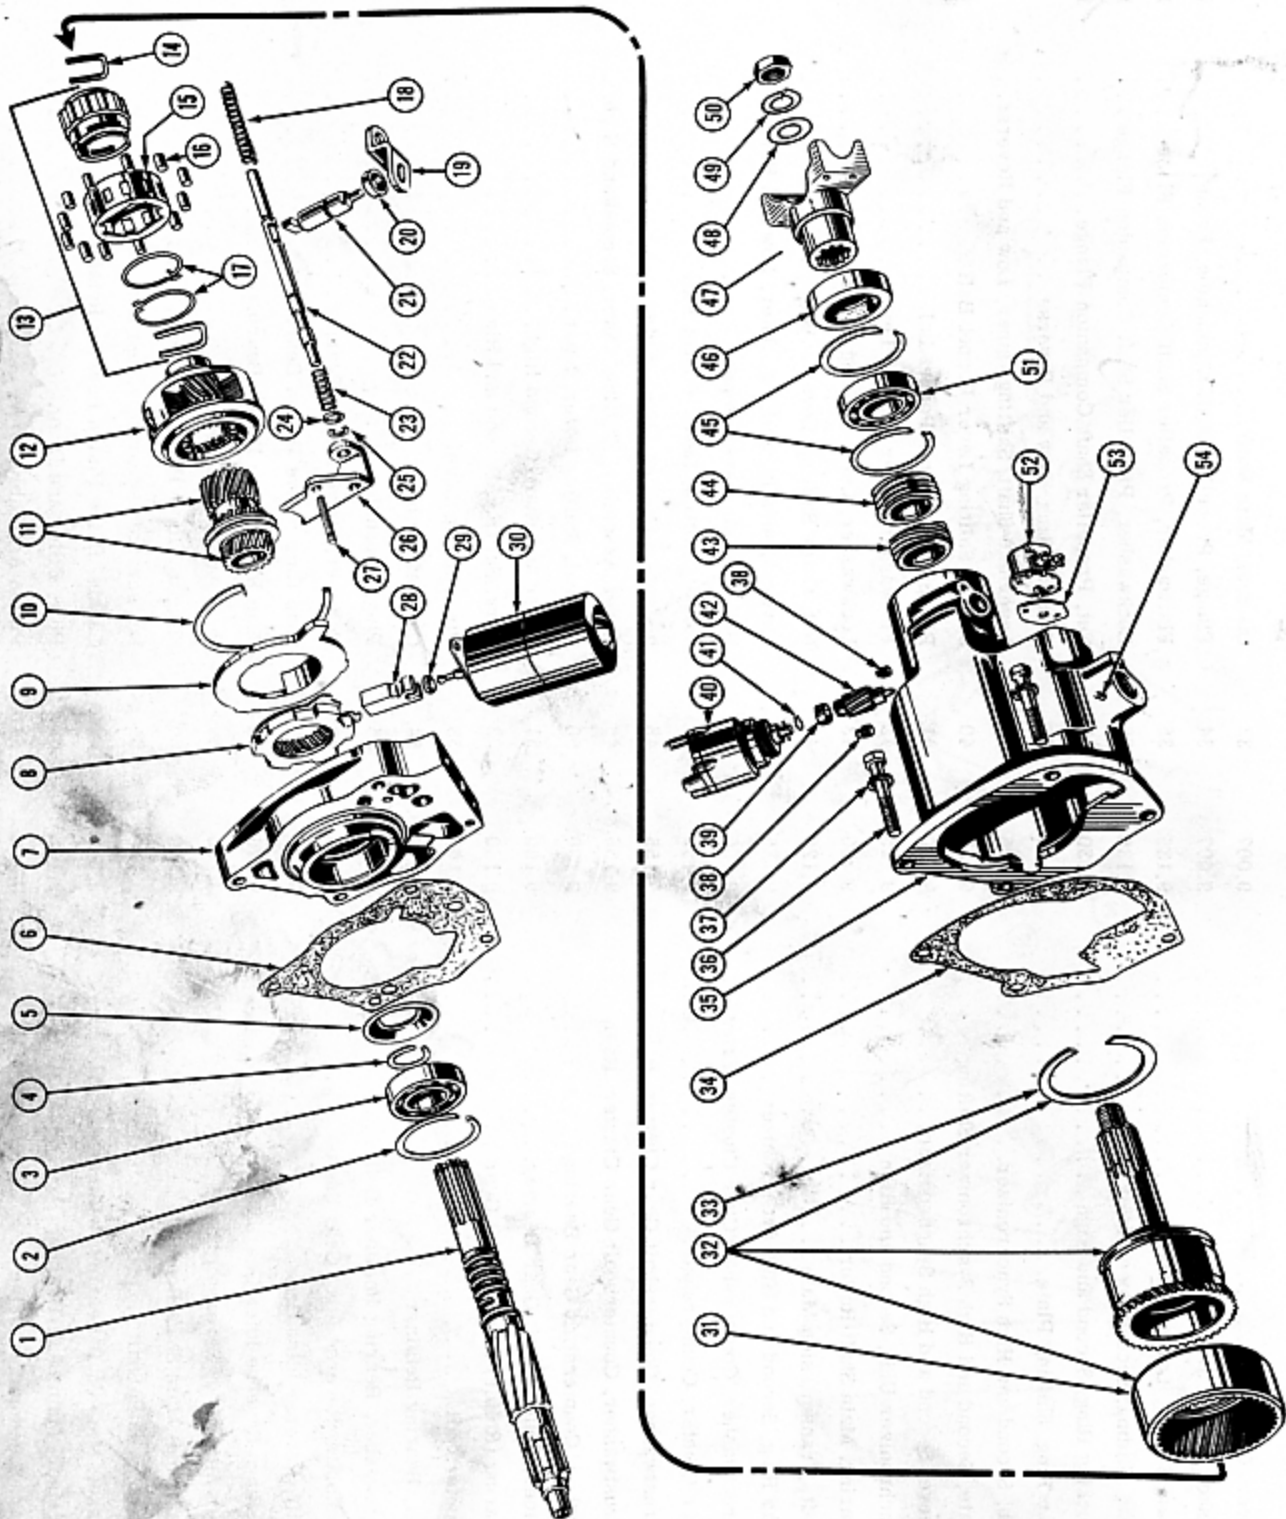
OVERDRIVE UNIT—EXPLODED VIEW
